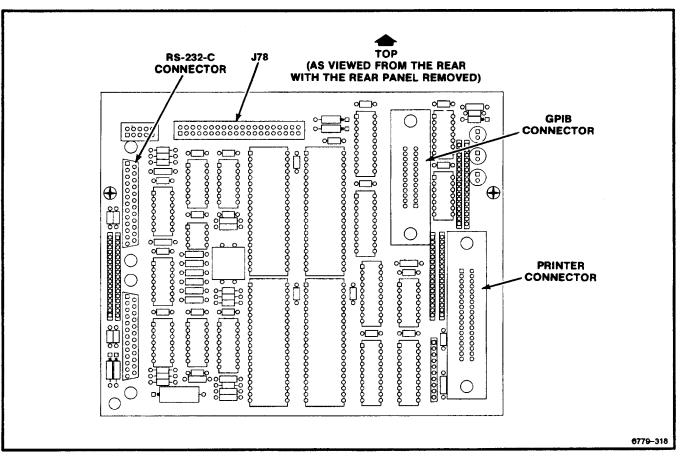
Connector locations for removal of the A12 Rear Panel board.
